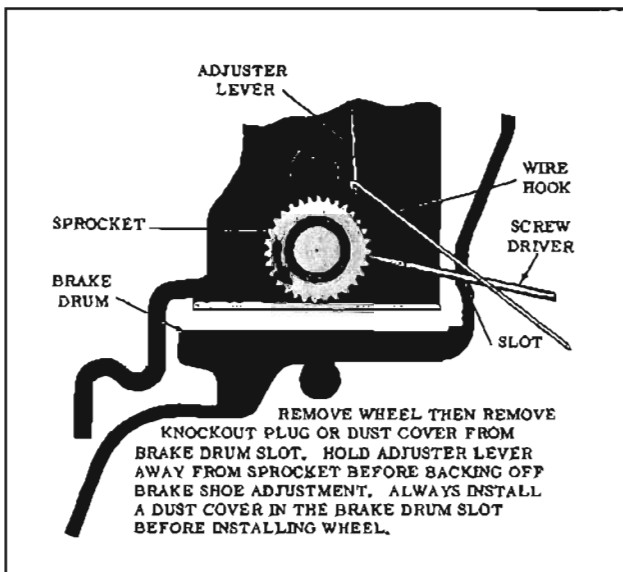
Backing Off Brake Shoe Adjustment (34, 35, 36, 38 & 39 Series)
